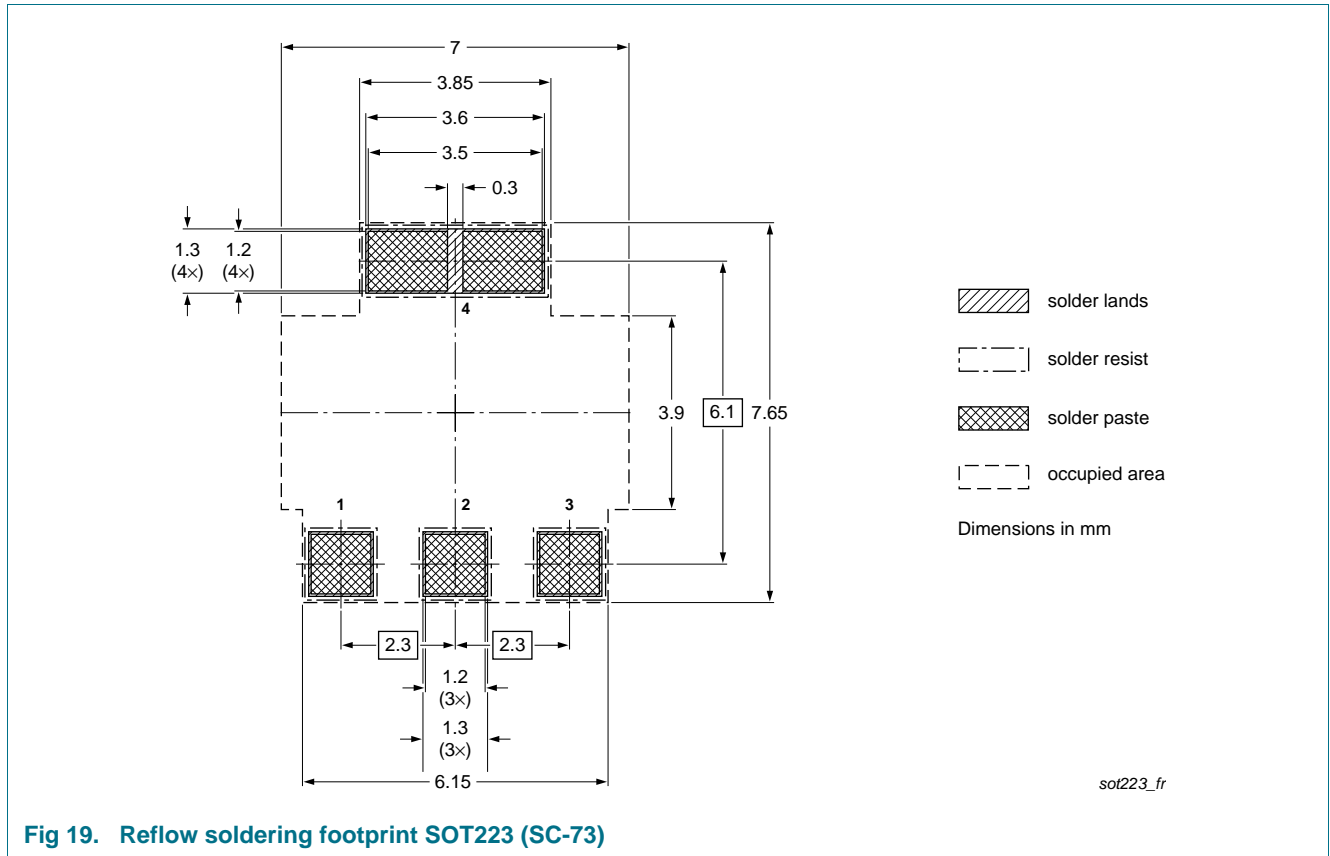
Reflow soldering footprint SOT223 (SC-73)
